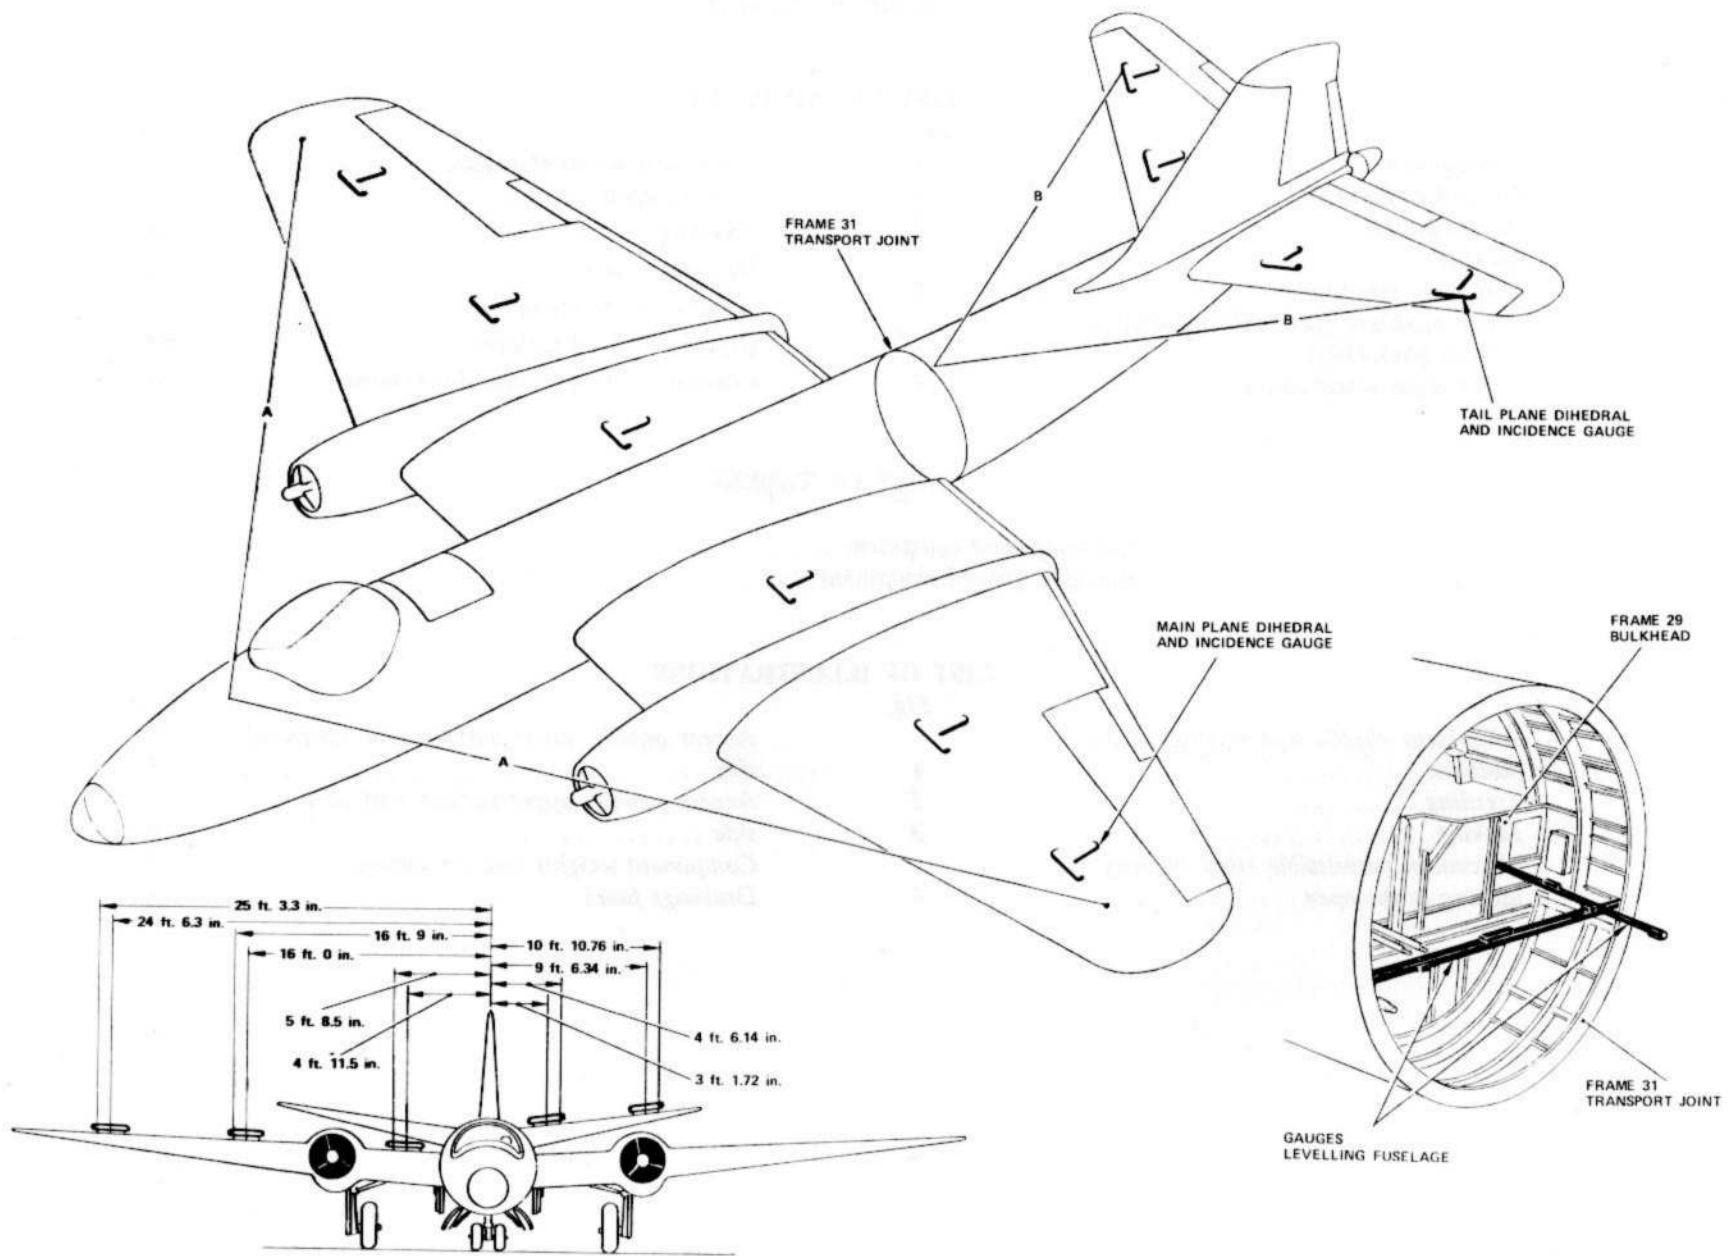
FIG. I. ALIGNMENT CHECKS AND RIGGING GAUGE POSITIONS
